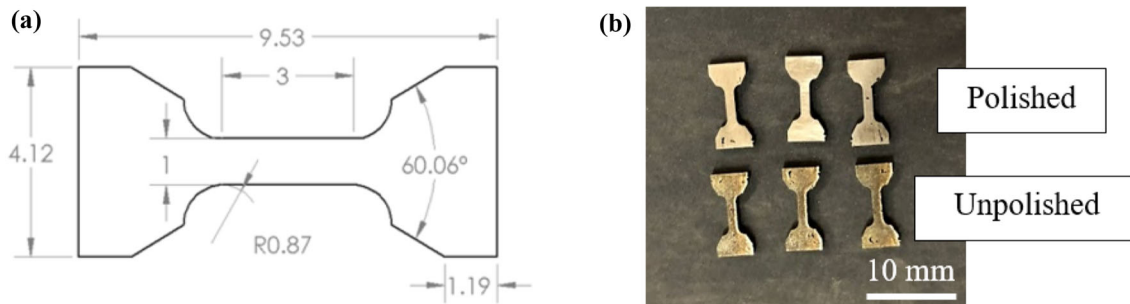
Fabricated tensile test specimens (a) dimensions (unit: mm) of the test specimens,<sup>27</sup> (b) the test specimens before polishing (bottom row) and after polishing (top row).
